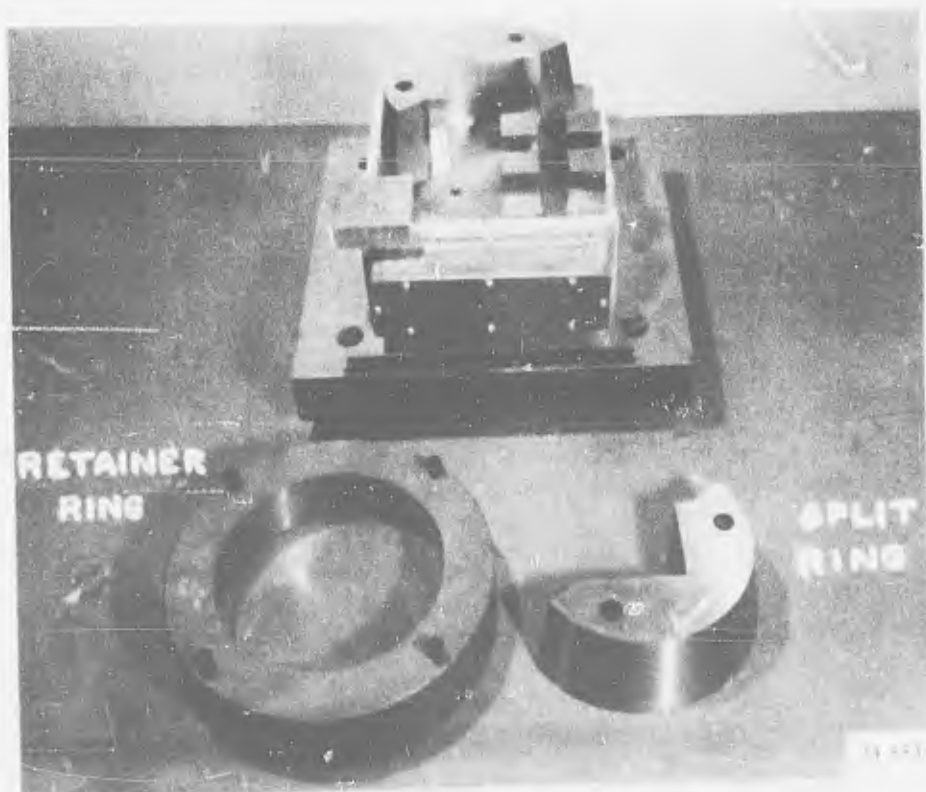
Segmented Lower Die for Initial Forging Research - Inserts, Split Ring and Retainer Ring.
